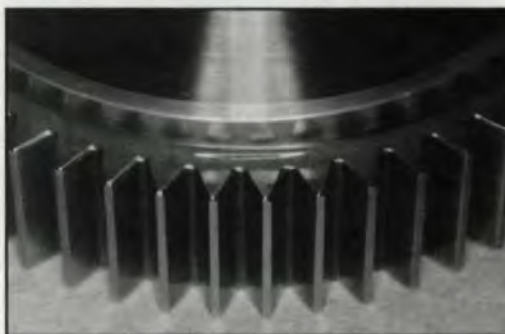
Spur gear end of 9310 multi-metal demonstration sun gear.
